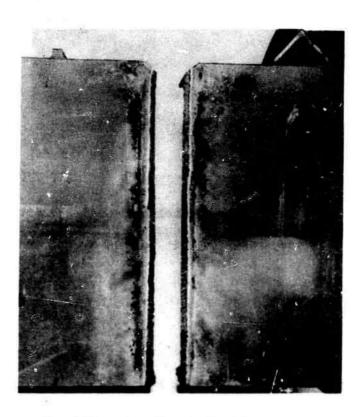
CUT IN FRAME, PRIMARY UNIT
